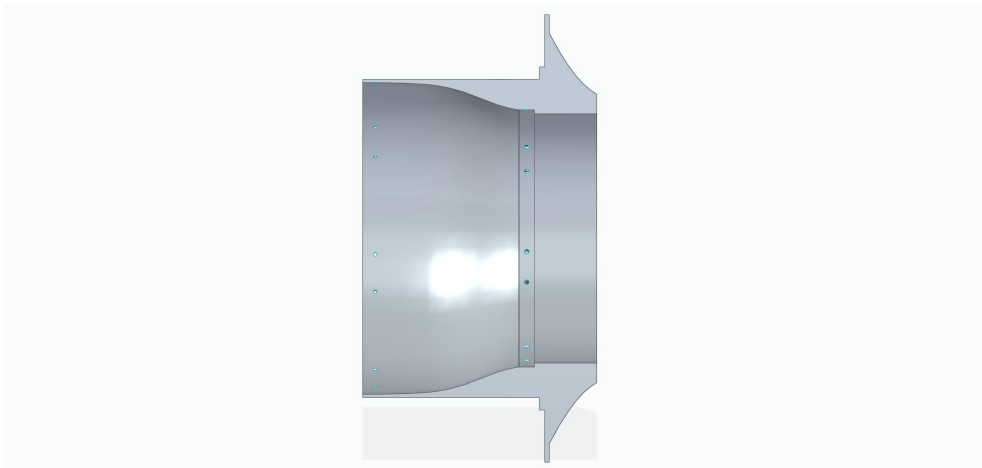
Section view of Stator Blade Housing by Muñoz
